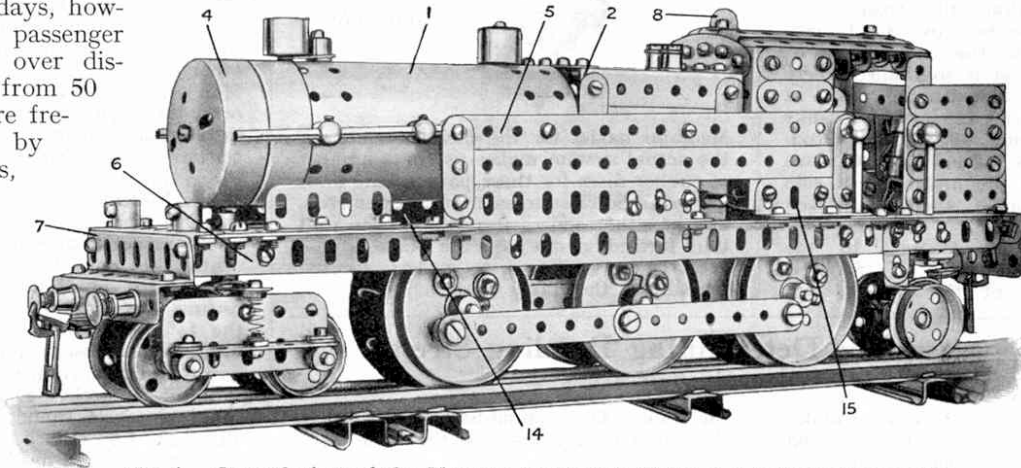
General view of the Meccano Clockwork-driven 4-6-2 Tank Locomotive
